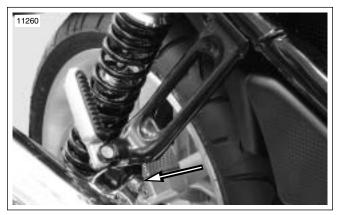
Right Side Passenger Footrest to Exhaust Bracket Fastener
